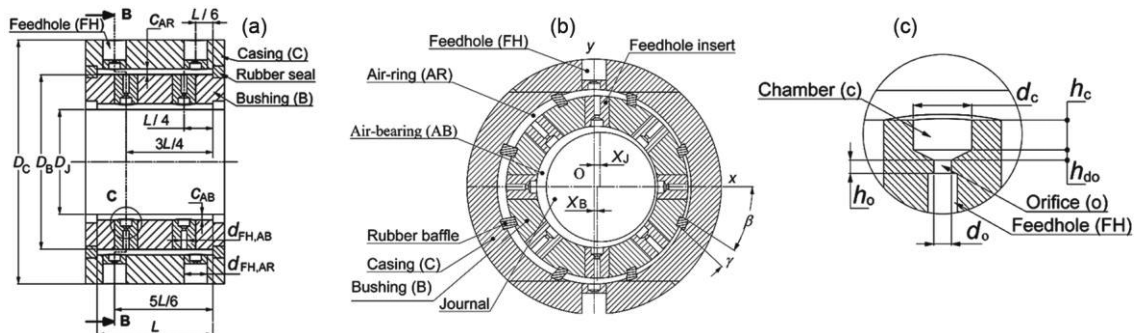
(a) Longitudinal-section of air-ring bearing (Detail A of Fig. 2), (b) Cross-section of air-ring bearing (Section B-B of Fig. 3(a)) & (c) Cross-section of feed-hole (Detail C of Fig. 3(a)).
